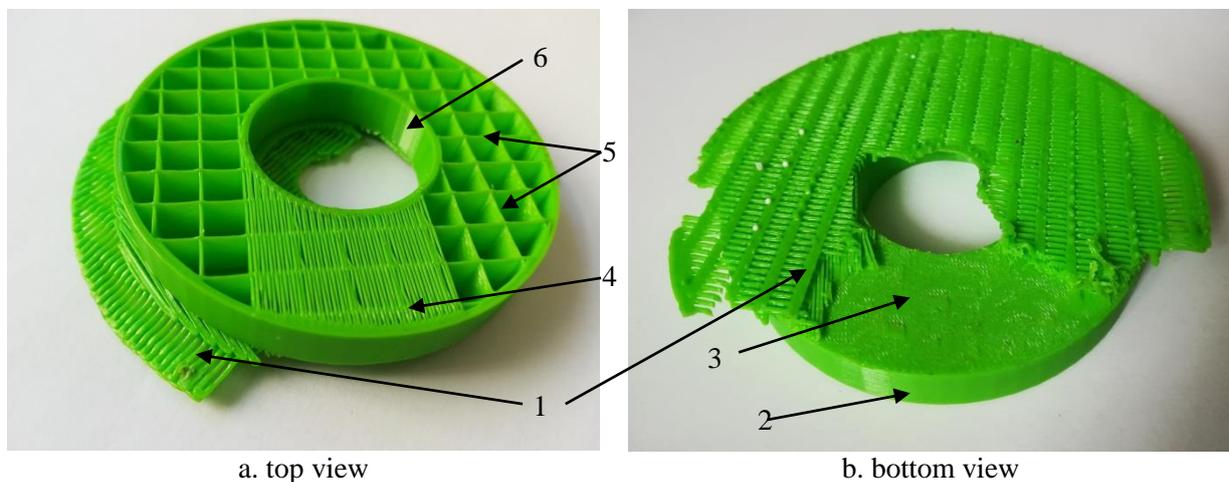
Cylindrical parts manufactured by 3D Printing (FDM): 1 – support; 2 – outer cylindrical surface; 3 – lower front part (in contact with the support); 4 – upper front part (at the manufacturing beginning); 5 – piece fill elements (for a 13% fill rate); 6 – inner cylindrical surface.
